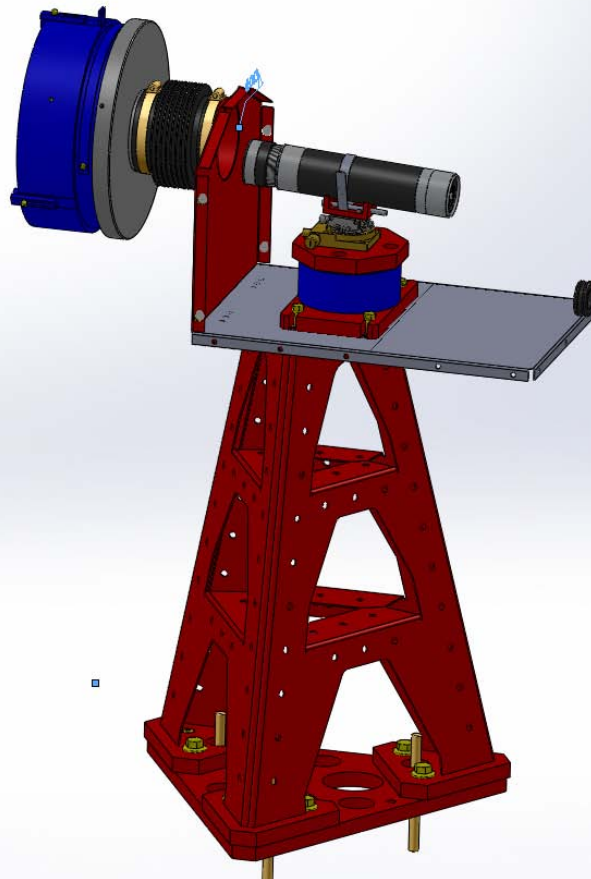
PR3/SR3 Transmitter Pier Assembly. Shown with cover removed.
